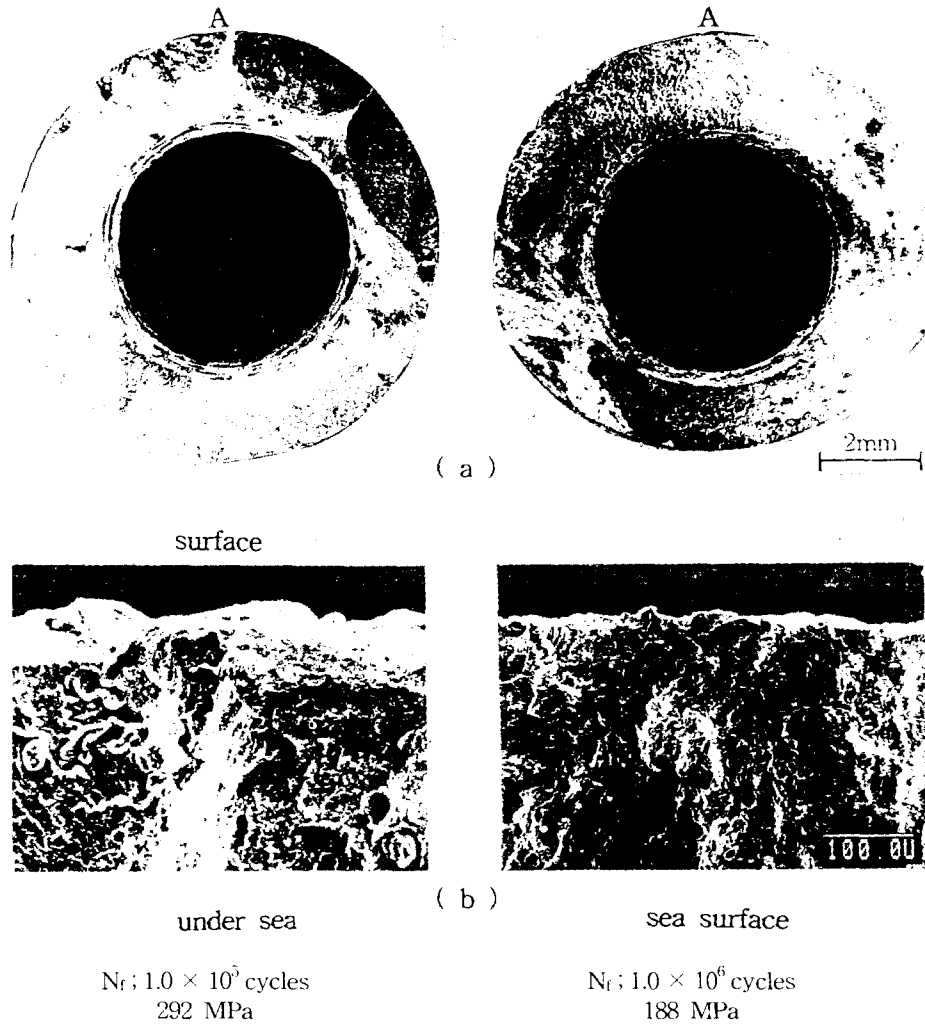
Fractography of hollow shaft specimen of 2mm thickness corroded with 3% NaCl solution during 100 days
